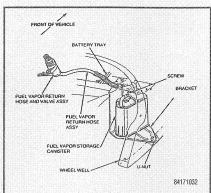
Evaporative canister location— 5.0L engine equipped vehicles
